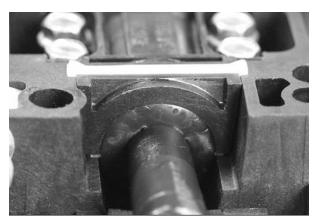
Grommet and Cable Compressed in Cable Clamp .
